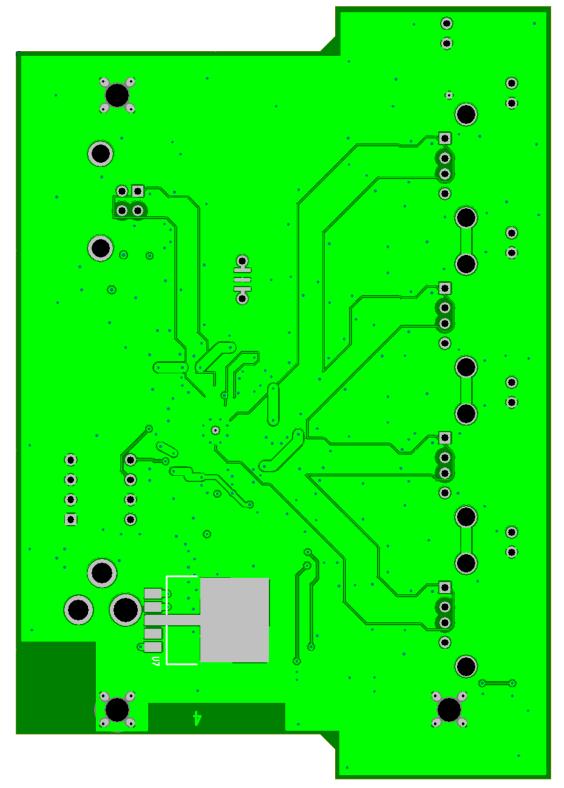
EVB_USB2514B Bottom Layer - Solder Side
